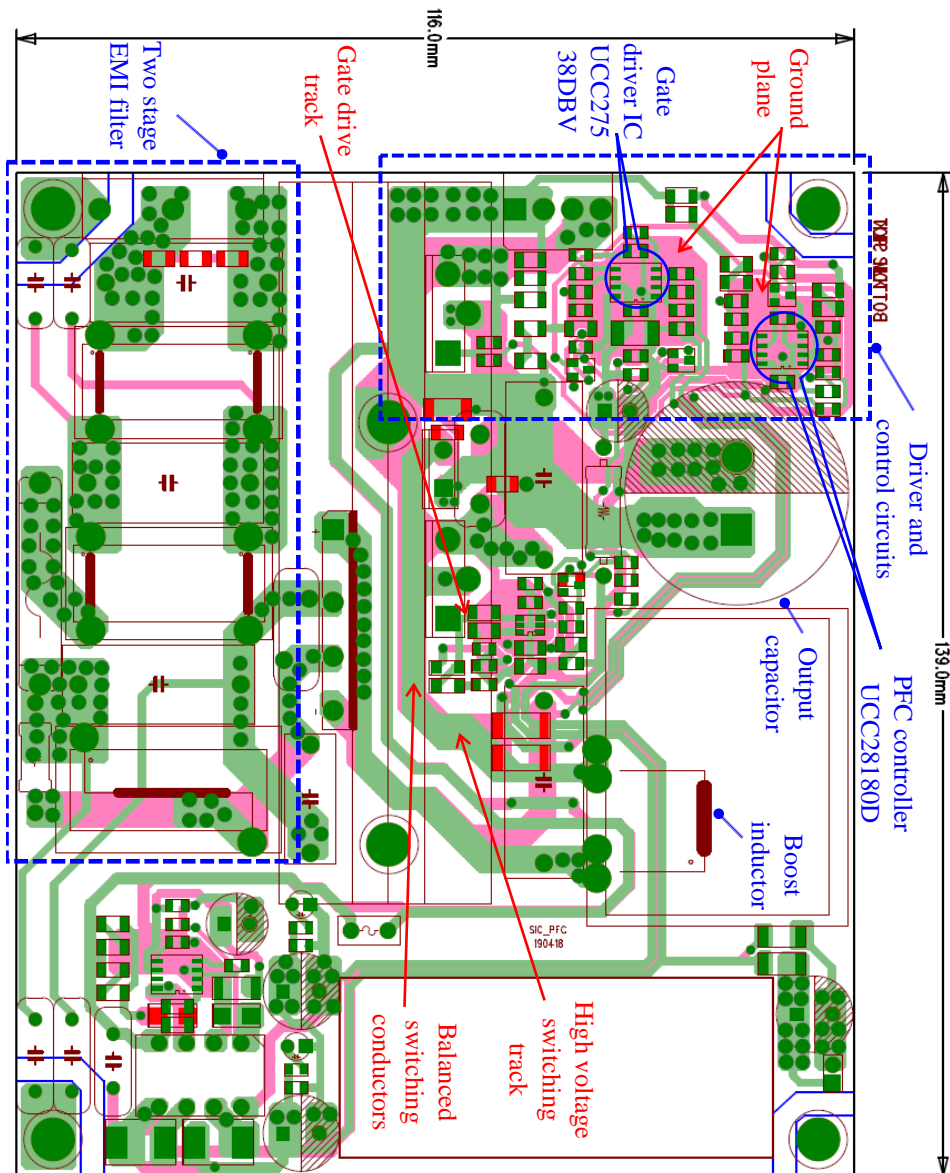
A complete component layout and routing of the PFC rectifier prototype board (two-layer board).
